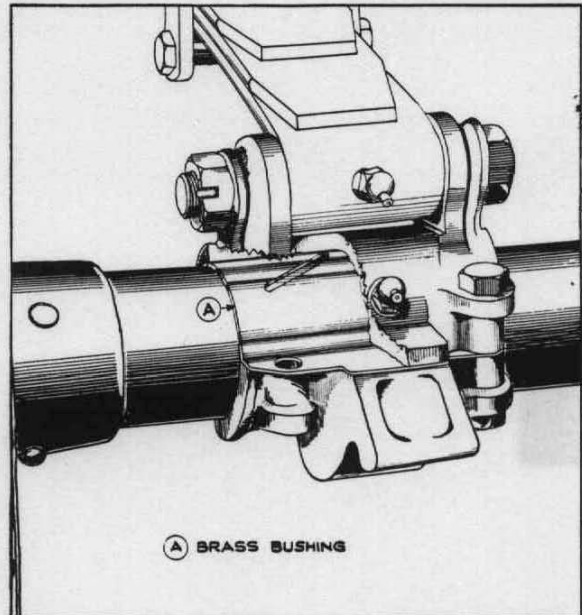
Spring Seat Cut-a-Way Showing Brass Liner.
